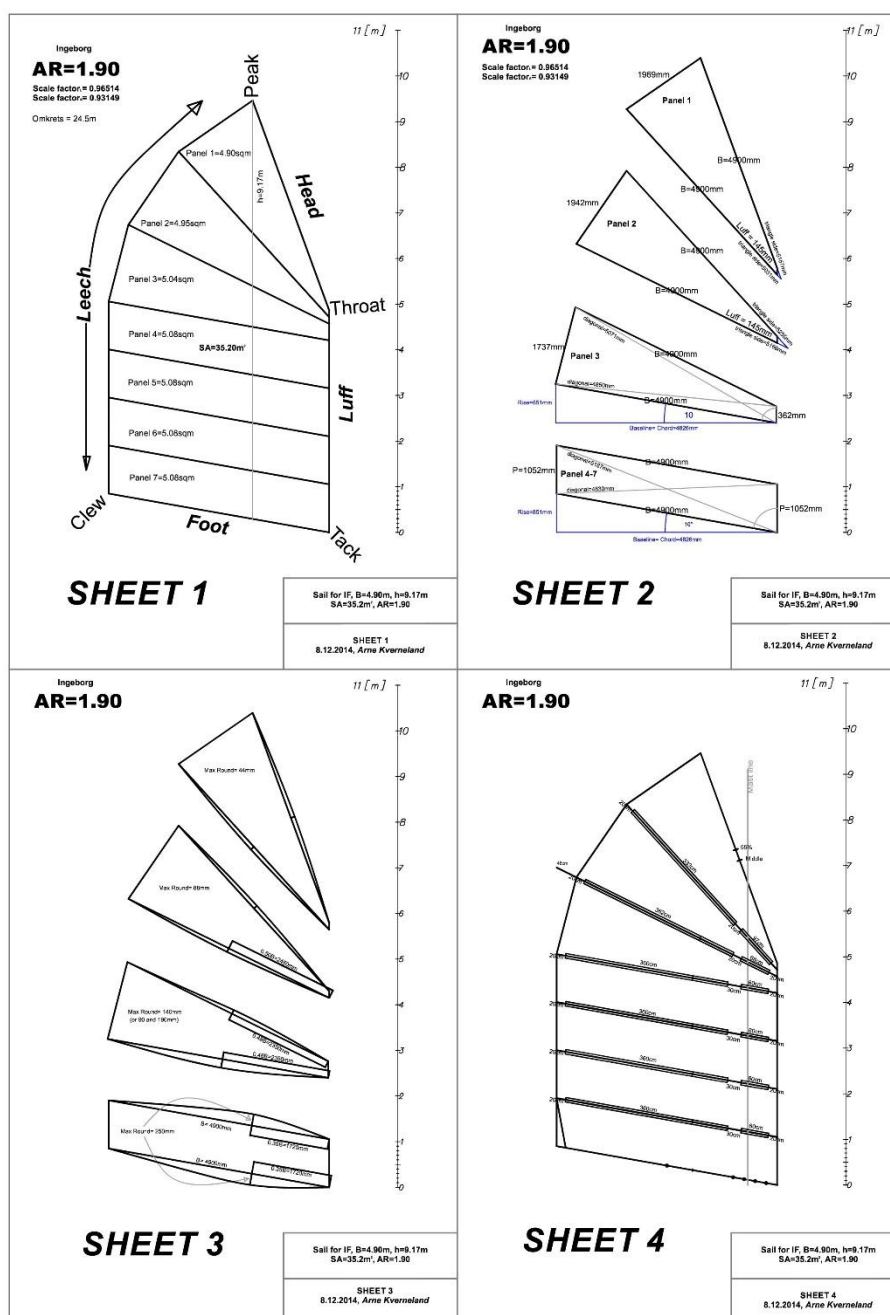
Sailplan sheet 1-4, taken from *Ingeborg*. Full size plans at the end of this chapter
